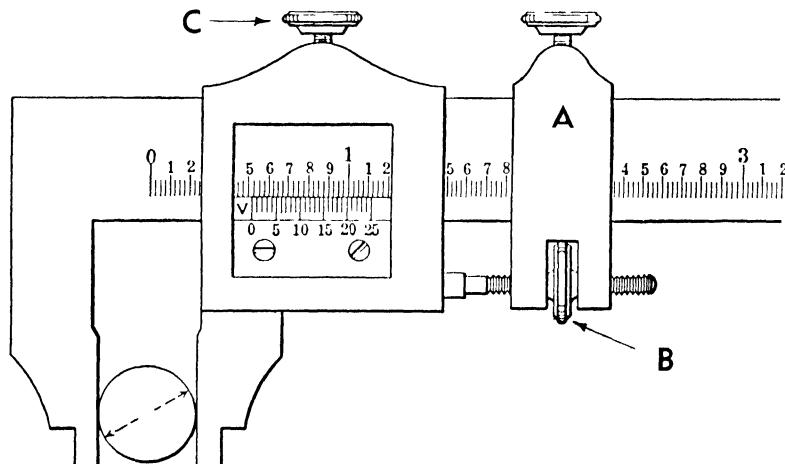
Typical vernier caliper showing vernier scale V and fine adjustment nut B.
